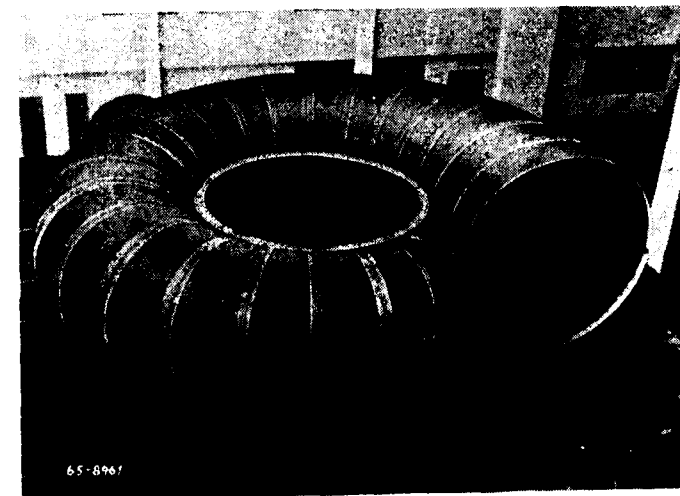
Welded spiral of Kaplan turbine, 5000 mm. introductory diameter.
